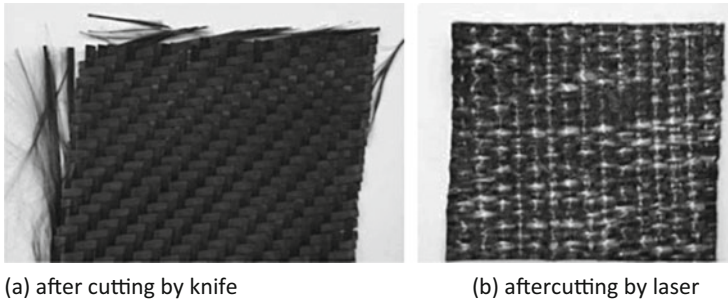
Cutting edge of a CF/PEEK woven fabric after cutting by knife and laser beam [6], (a) after cutting by knife, (b) after cutting by laser
